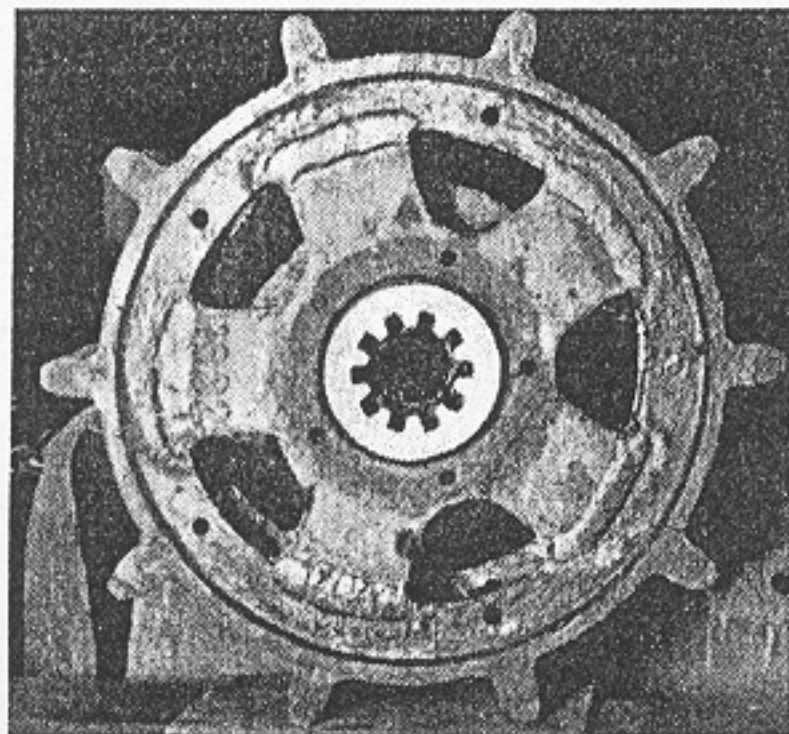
Worn teeth were built up and each broken spoke of this manganese steel sprocket wheel for a tractor were repaired by arc welding.
